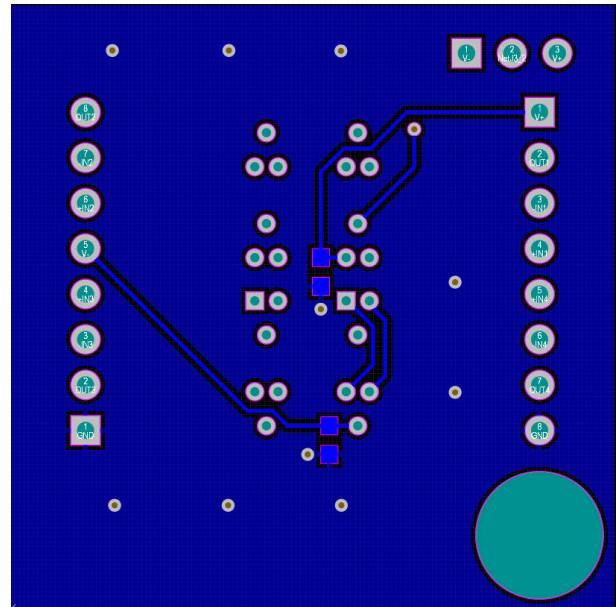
AMP-PDK-SC70-6 Bottom Layer
